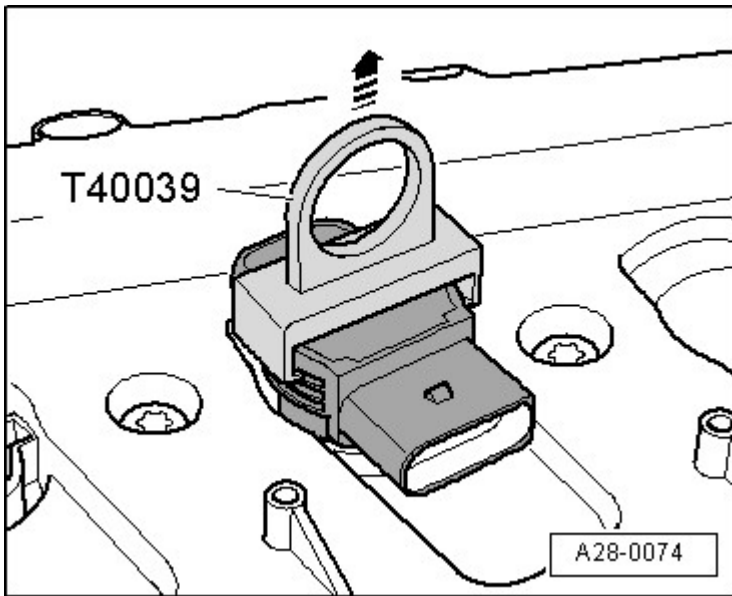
Identifying Ignition Coil Puller T40039 To Remove Ignition Coils
